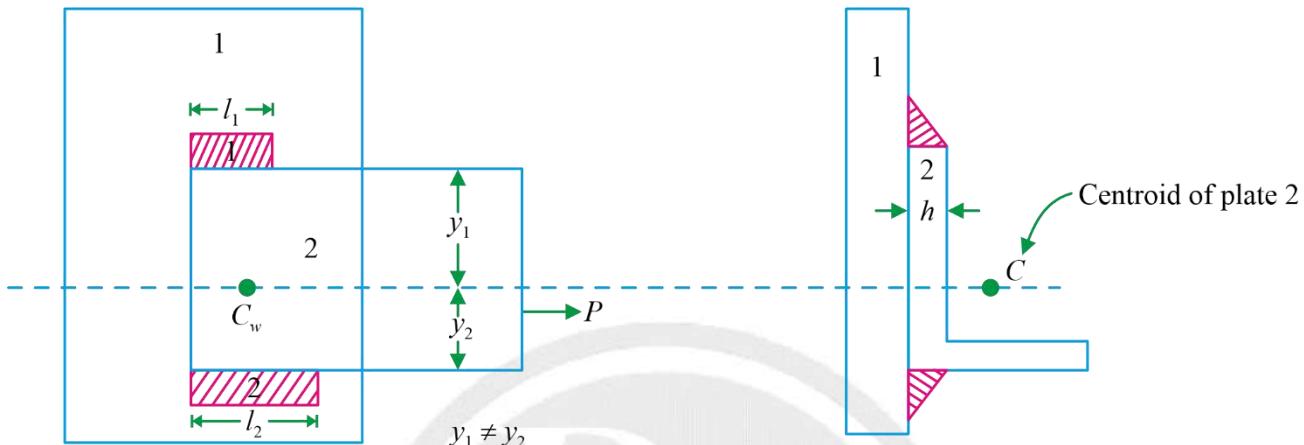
Unsymmetrical loaded parallel fillet weld.
